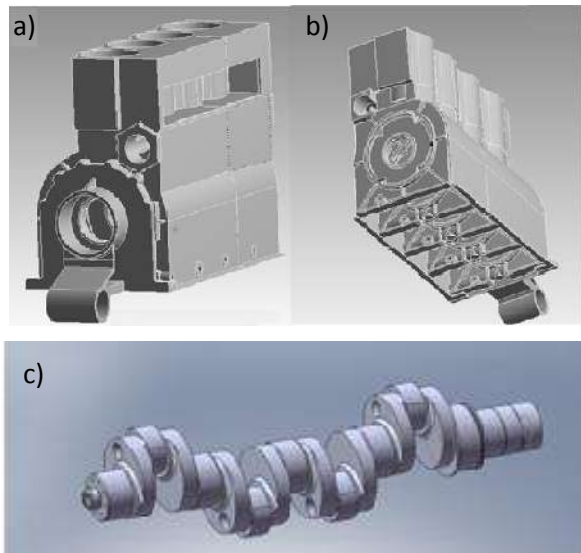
Models of the crankcase and crankshaft of 4-cylinder engine: model of the crankcase design No 2 (a), the crankcase design No 1 (b), the crankshaft model (c)
